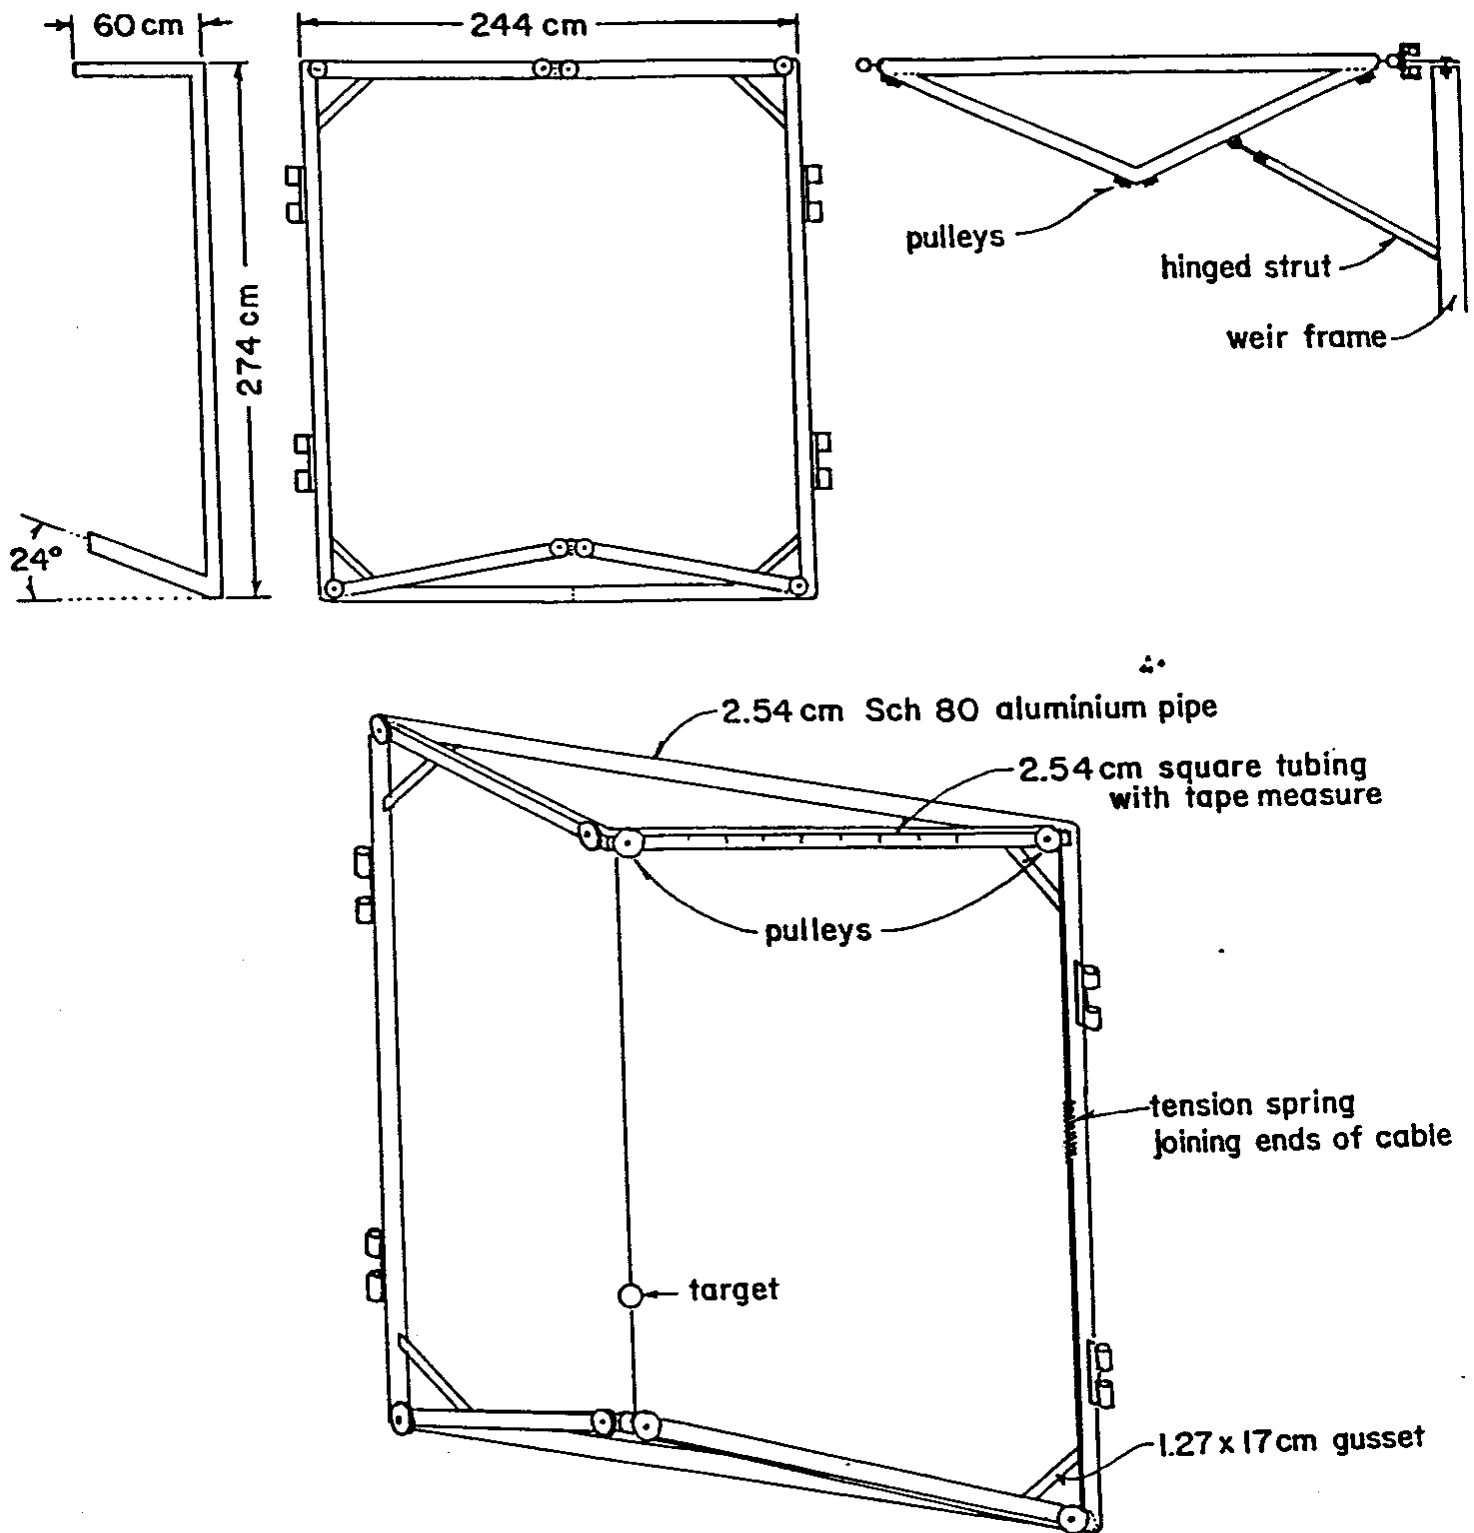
Side, front, top, and three-dimensional views of the target frame.
